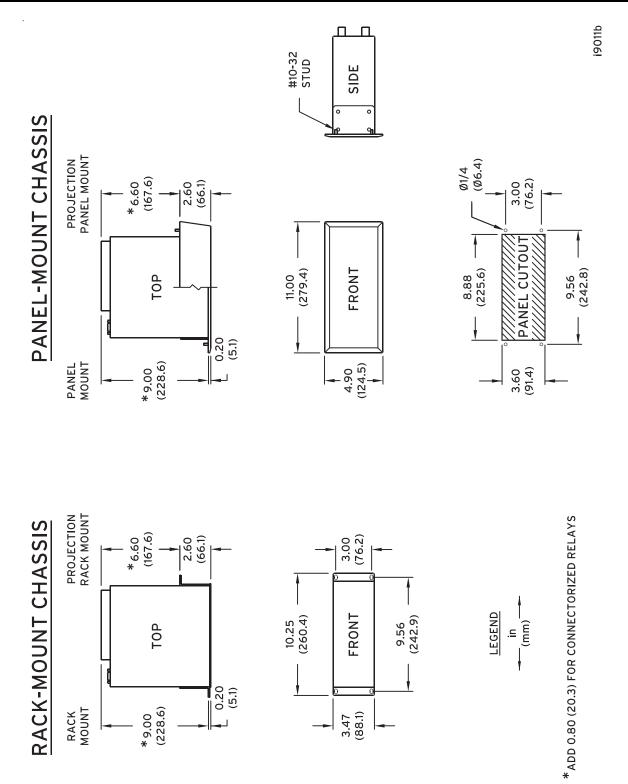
SEL-501 Dimensions and Drill Plan for Single Rack-Mounted Relay
